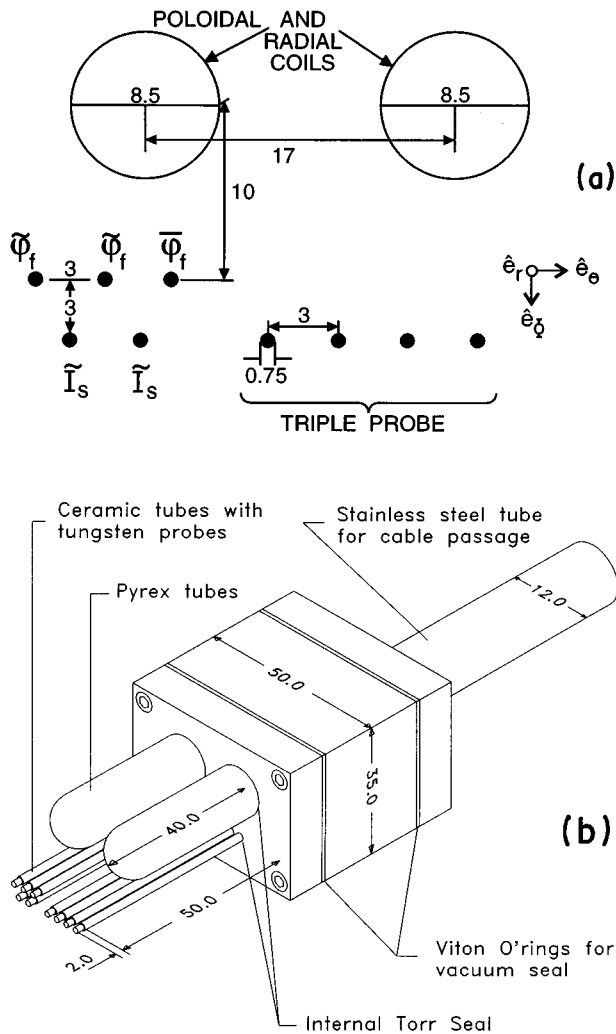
(a) Scheme showing the position of the probe tips and magnetic coils; (b) technical drawing of the probe assembly (all dimensions are in mm).
